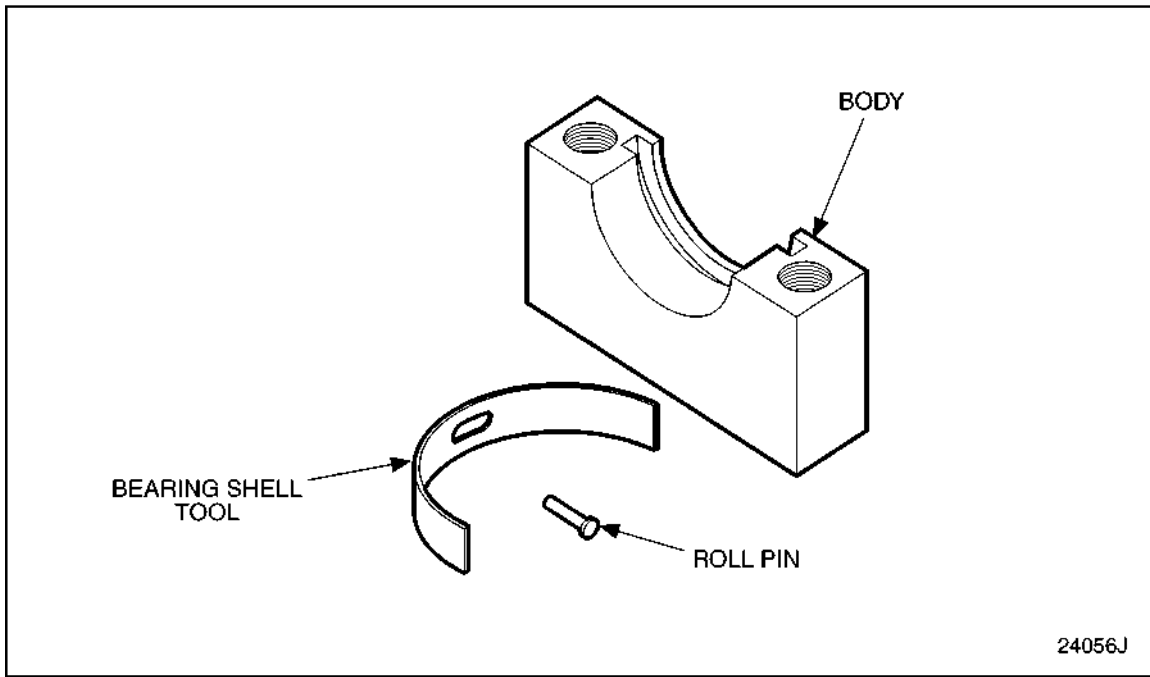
Crankshaft Main Bearing Remover, J 36187-A
